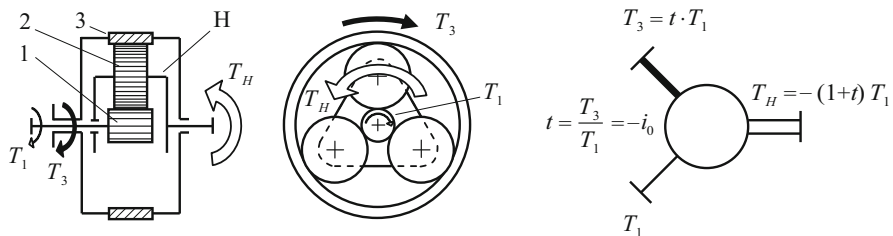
The most common type of simple single-carrier PGT, torques at its central elements, and Wolf-Arnaudov’s symbol (1, sun gear; 2, planets; 3, ring gear; H, carrier)
